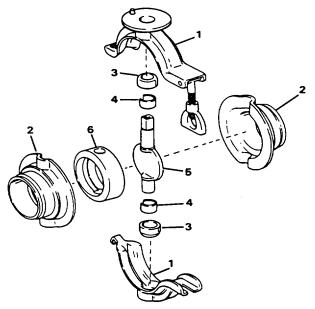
Butterfly Valves (MODEL WTA-060 ONLY)
